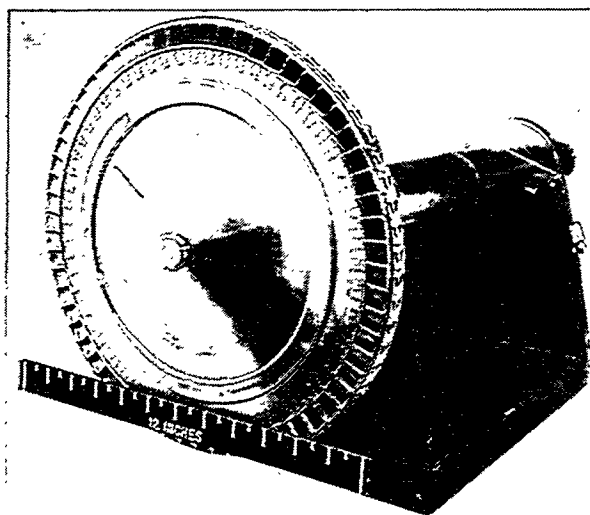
Turbine Rotor Bladed Disc (11.5 Inch Pitch Diameter)
